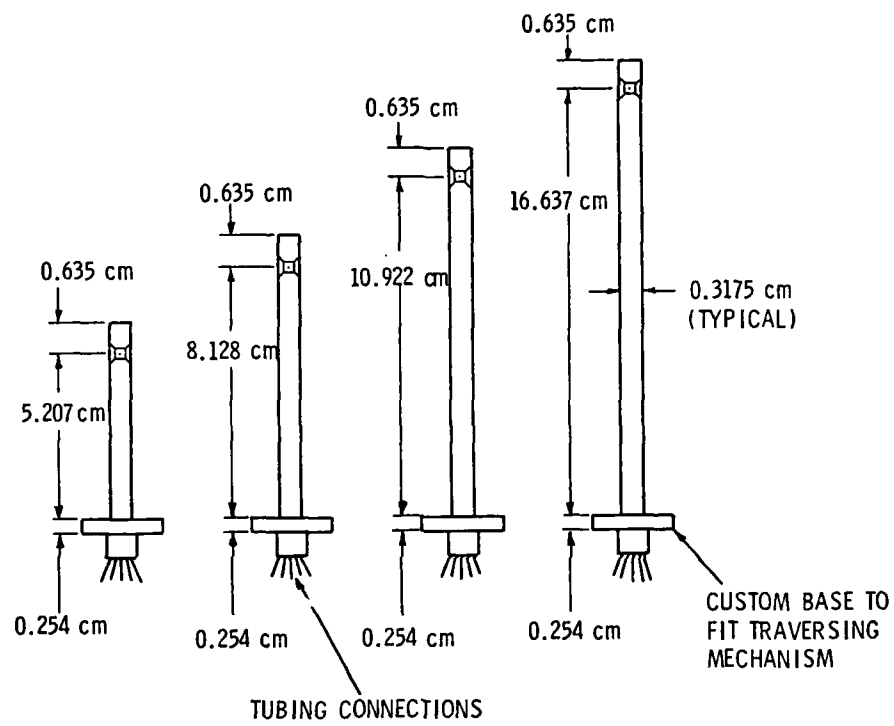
Dimensions of Rotating Five-Hole Prism-Type Probes
